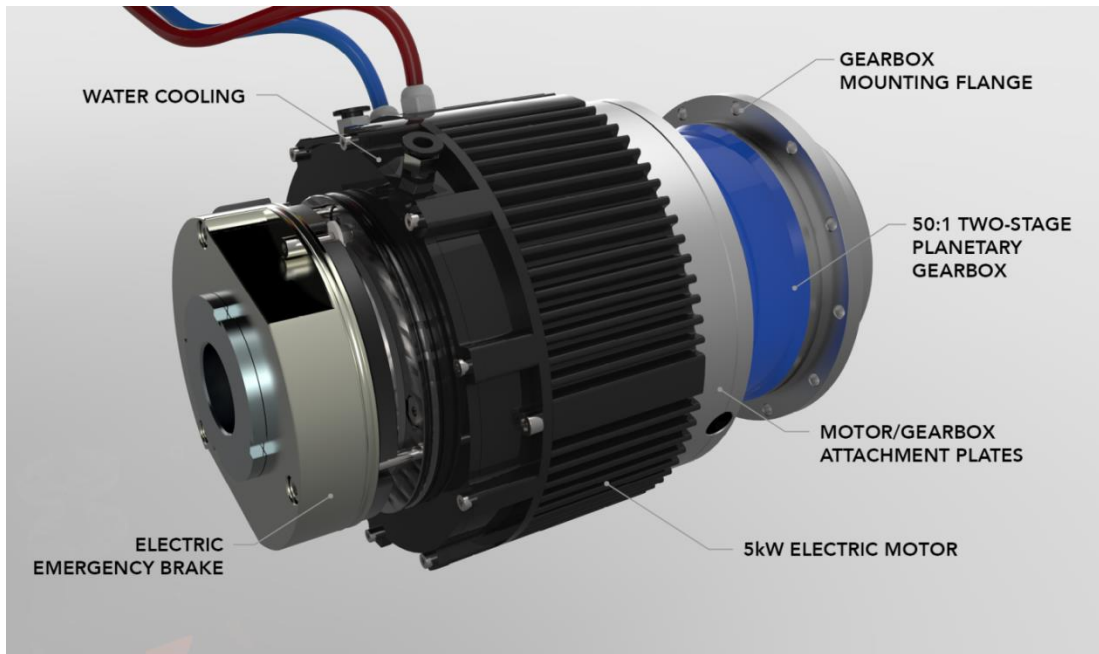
Drive unit assembly showing the e-brake, motor and gearbox.
